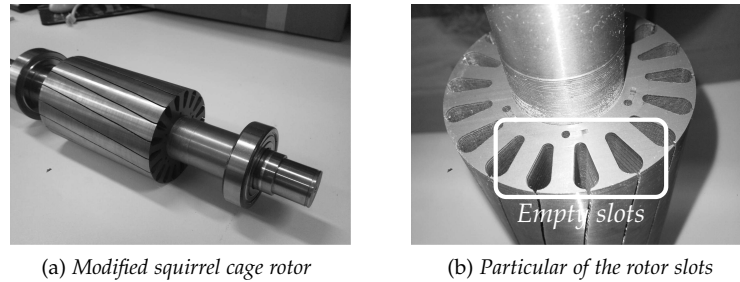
Modified machine used for the experimental tests. The stator is the same in Tab. 5.2, but the cage rotor is without aluminium bars.
